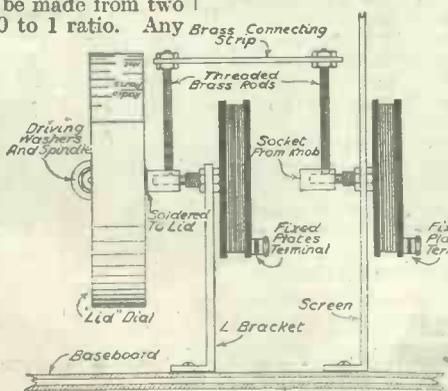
Details for making a twin-gang slow-motion condenser.
